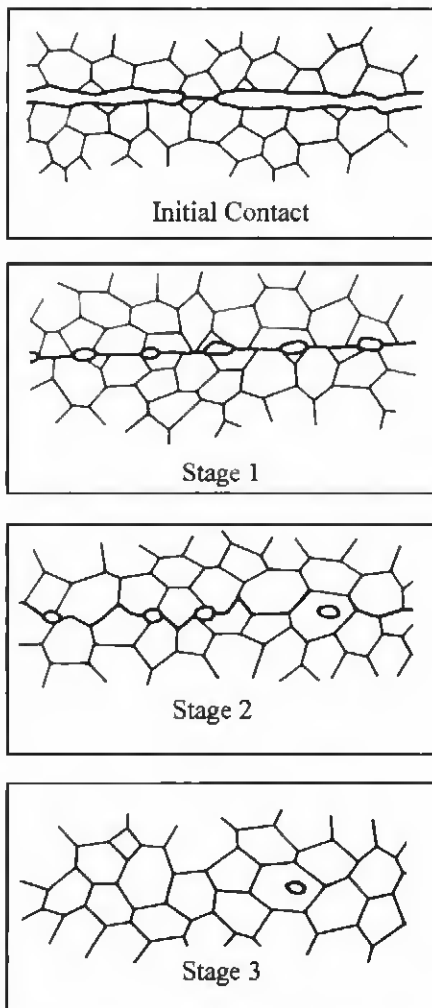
Schematic illustrating stages of diffusion welding.
